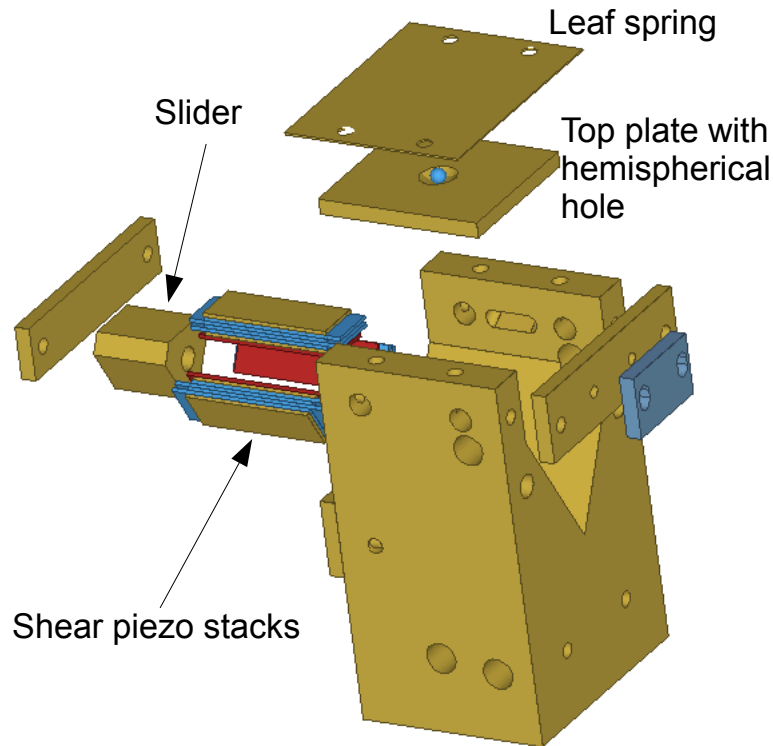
Exploded view of fiber optic interferometer walker. blue represents shear piezo stacks, red represents sapphire plates that are stacked onto alumina plates. The top plate has a spherical hole with a ball that is smaller in diameter than the diameter of the hole.
